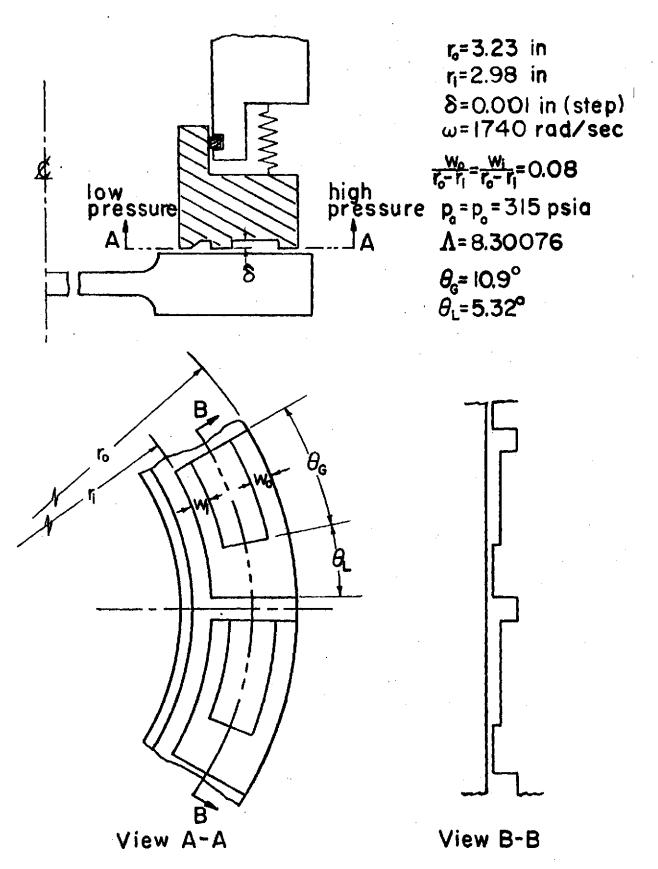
The geometry of a shrouded, Rayleightstep thrust bearing
